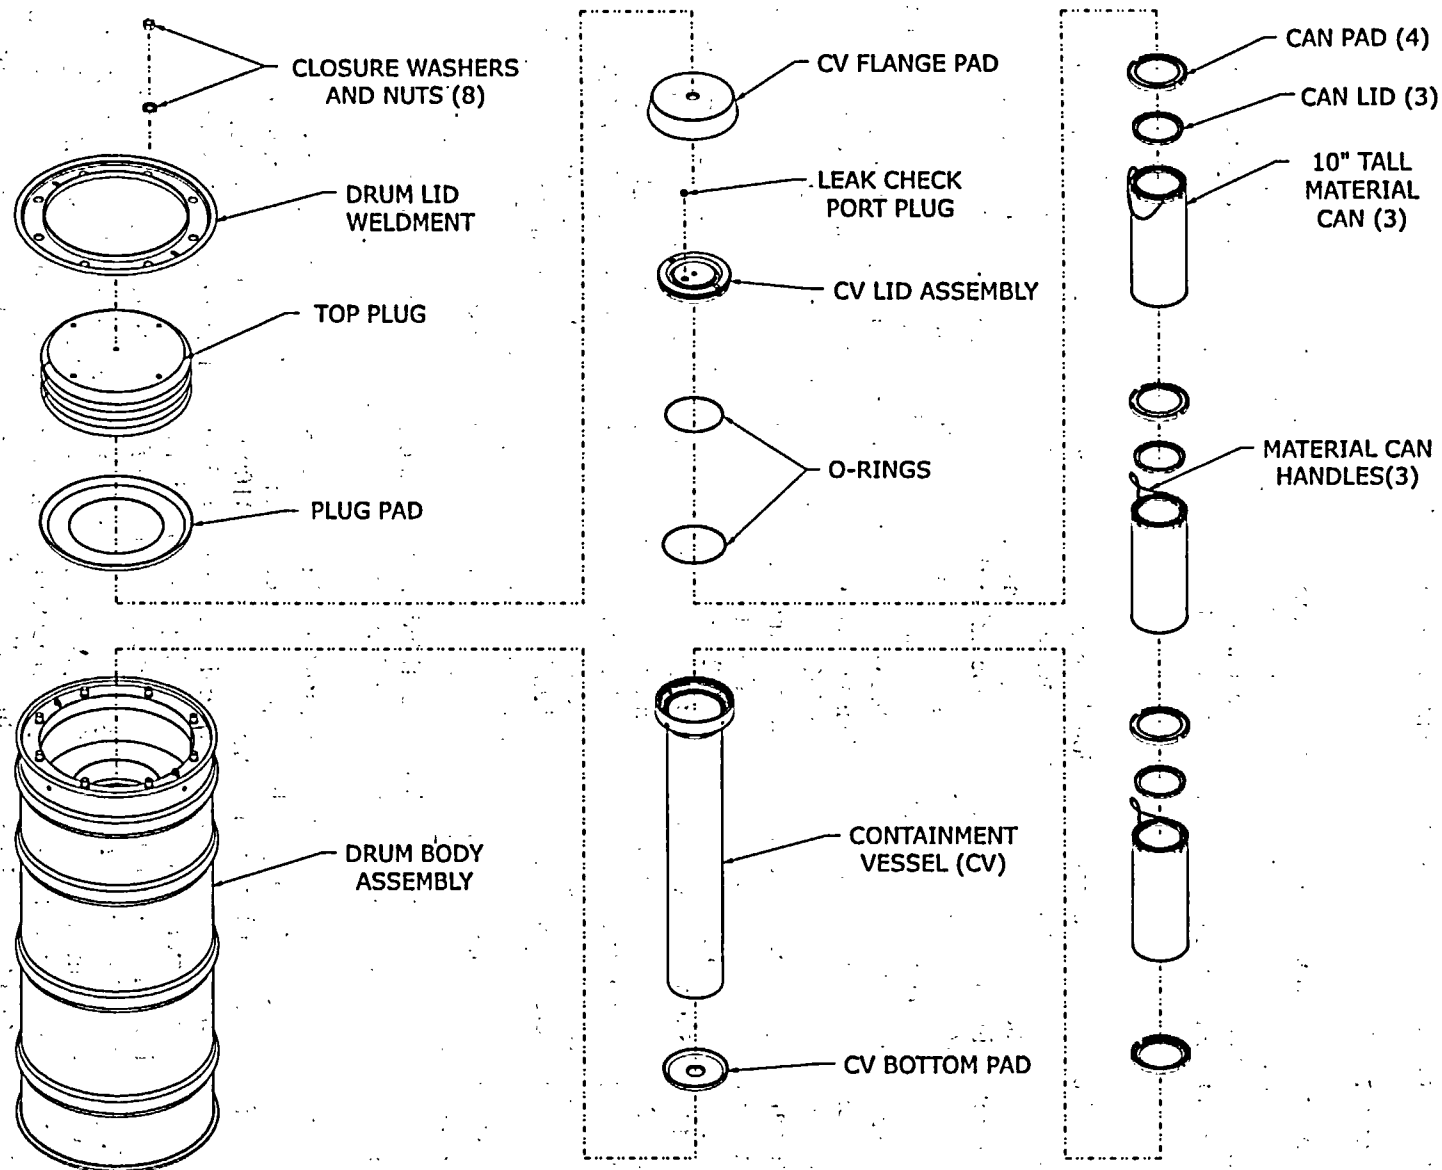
Exploded view of the ES-3100 package with bulk HEU contents.
